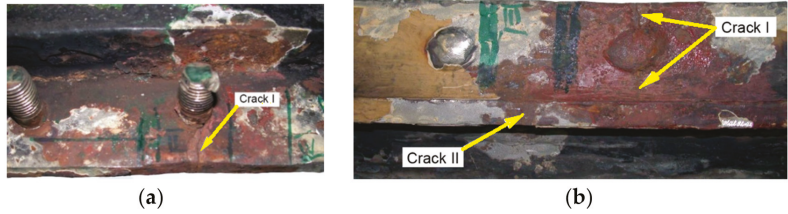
Macroscopic examination (handy-size bulk carrier 30210 DWT): (a) view of crack I, (b) view of crack II (crack I is visible on the right-hand side).
